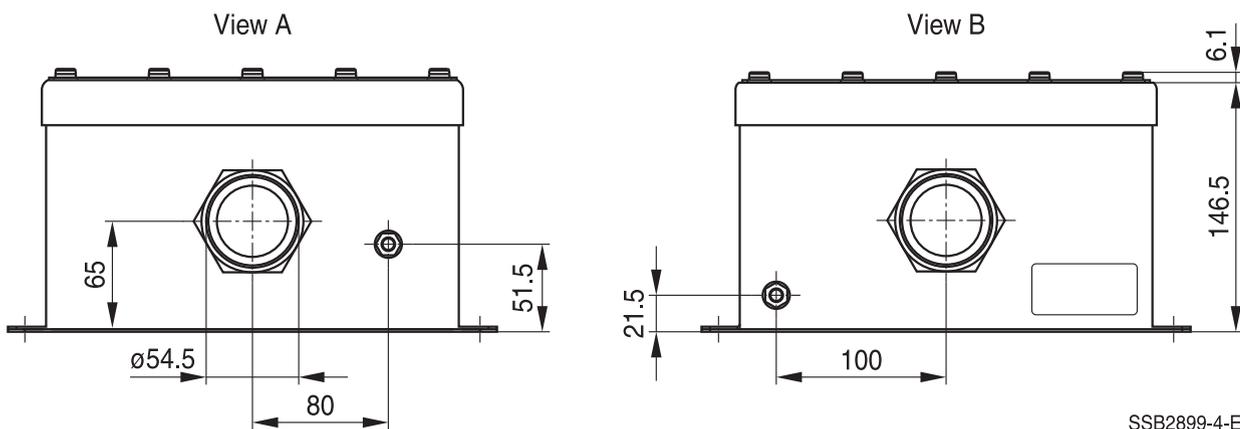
B84299C1101E313 (4 × 100 A) – details of connection
